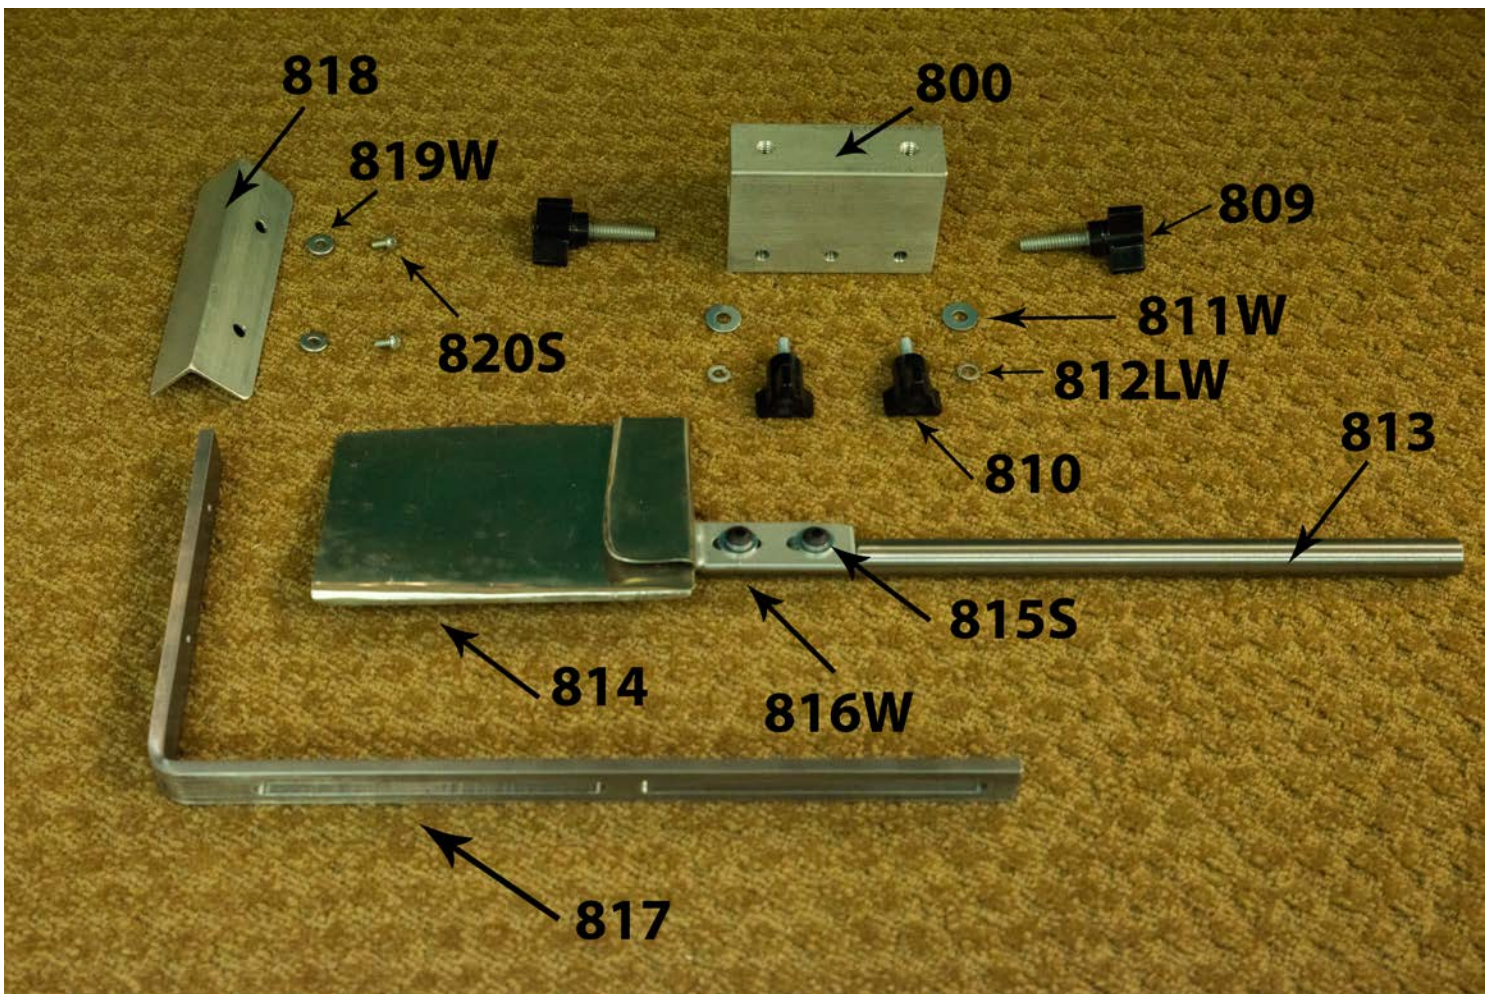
TAPESTRY GUIDE ATTACHMENT
